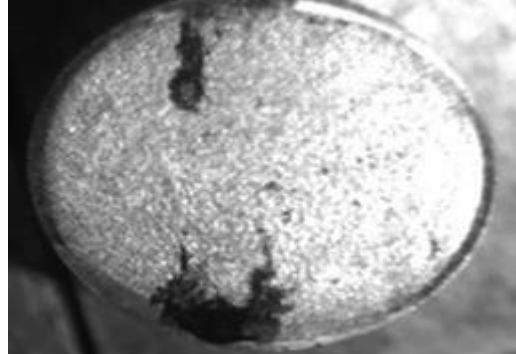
Reflected fracture surface showing inclusions and striations
